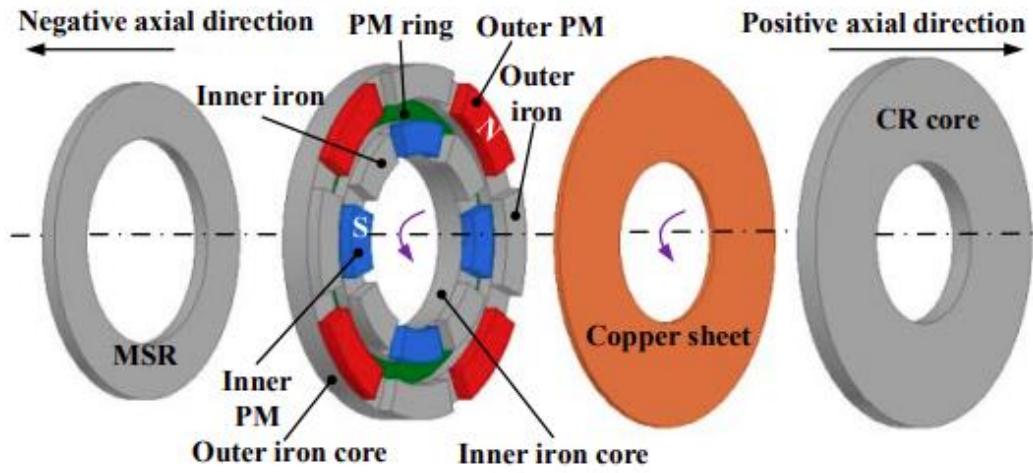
18 Exploded view of PMECC with movable stator ring [19]
